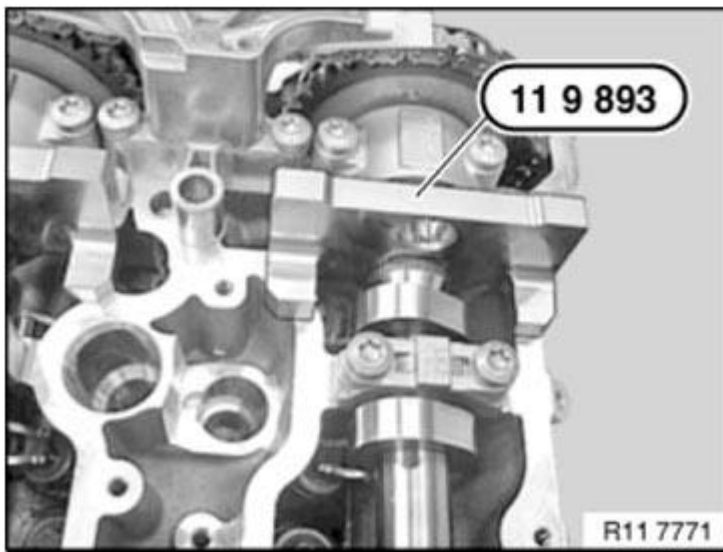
Identifying Special Tool 11 9 893 On Intake Camshaft
